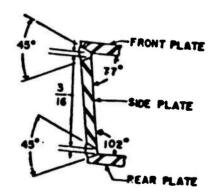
Cross Section of Applique Section Fabricated with a Full-constration Held Joint.
